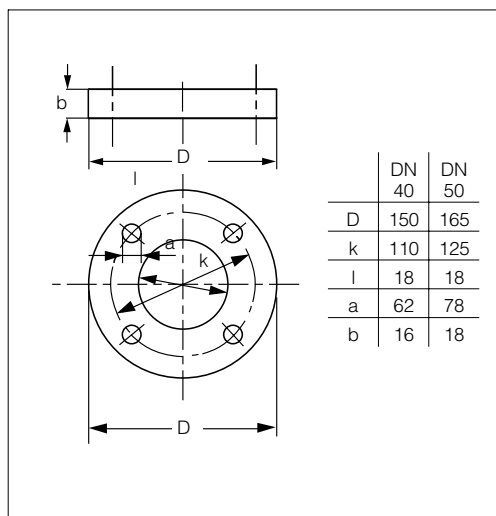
Dimensioned drawing of the used flanges for the corresponding installation versions
